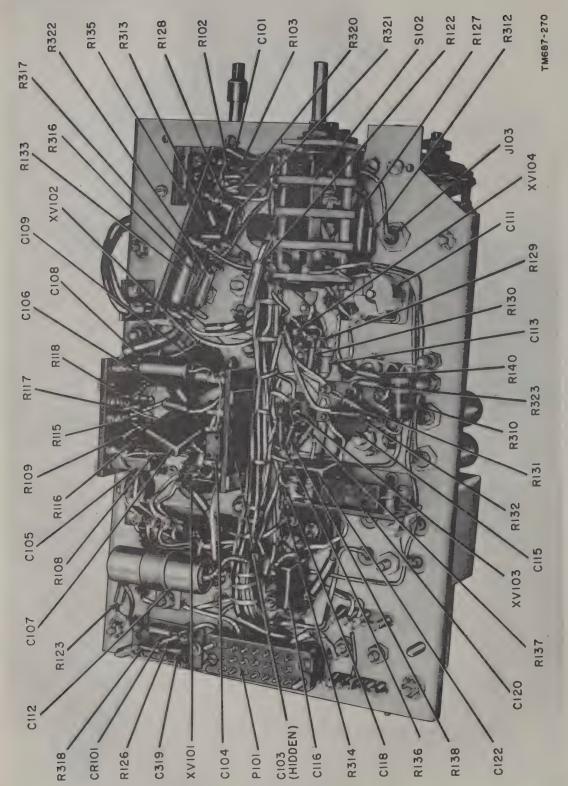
Transmitter base-band amplifier plug-in assembly, bottom side view.
